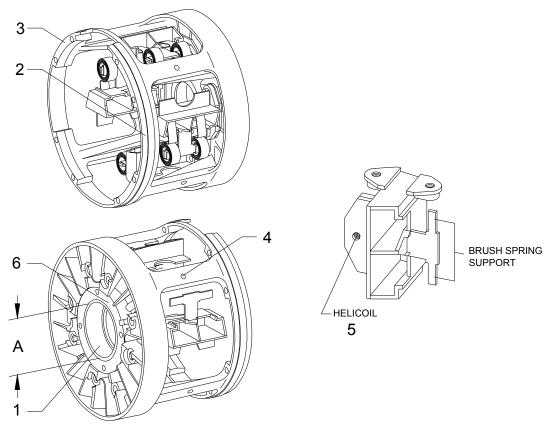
Inspecting Bearing and Brush Support Assembly
